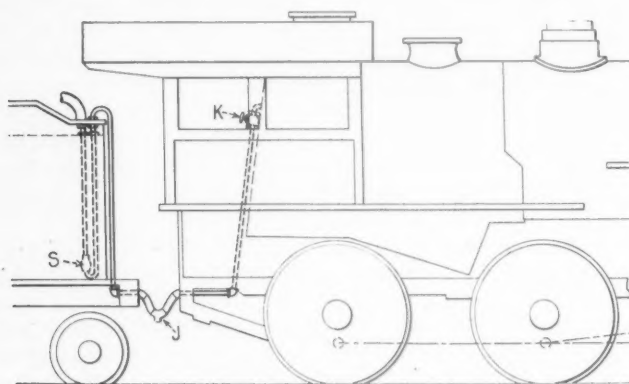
General Arrangement of Dittman Cold Water Sprinkler
